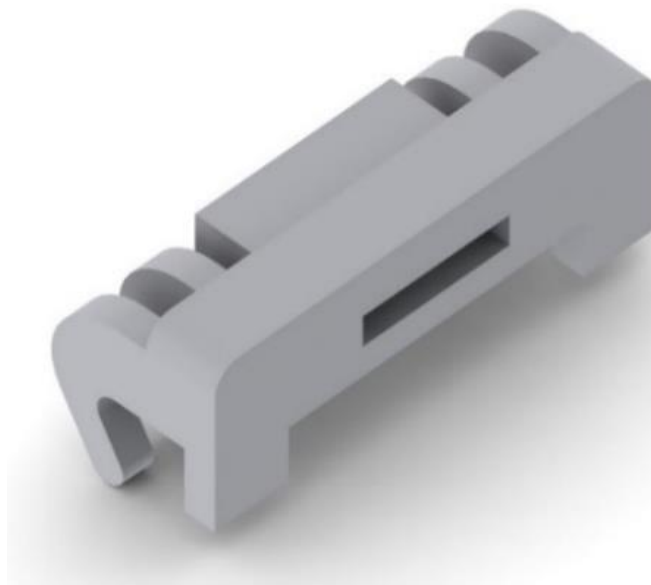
The attachment component that connects the ptosis crutch to the superior border of the spectacle frame. The attachment is a standard length; the height and width of the clip are adjusted according to the dimensions of the spectacle frame.
